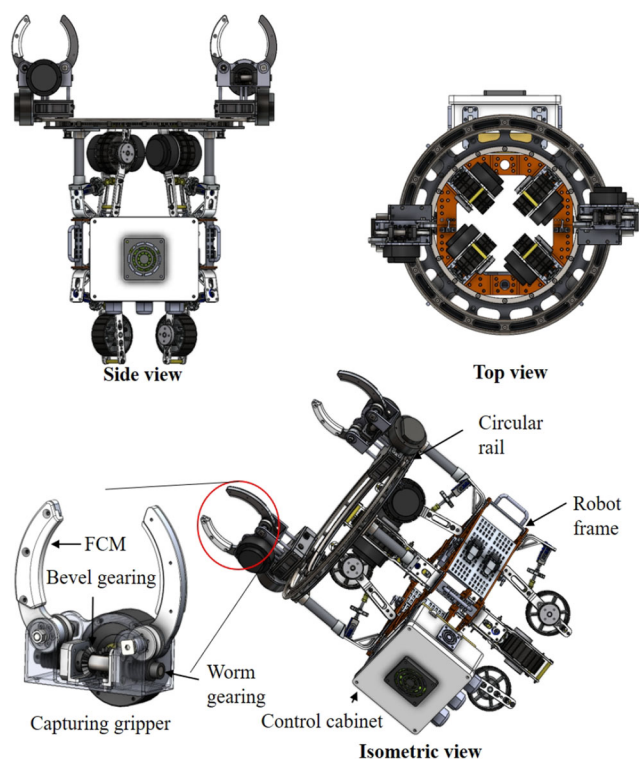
| Structure of the cable rescue robot, which integrates with a circular rail and two capturing grippers. [Color figure can be viewed at [wileyonlinelibrary.com](https://onlinelibrary.wiley.com/doi/10.1002/rob.22519)]
